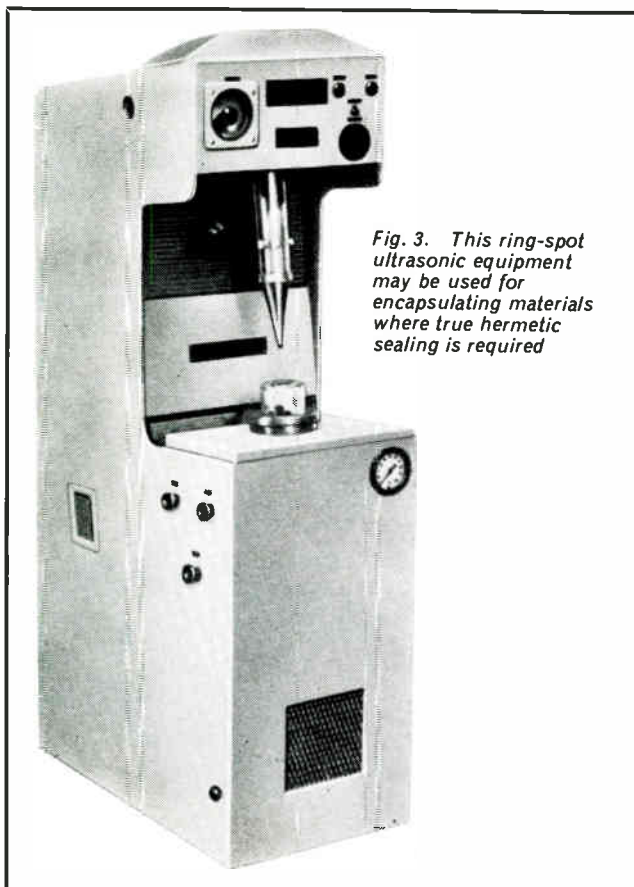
This ring-spot ultrasonic equipment may be used for encapsulating materials where true hermetic sealing is required
